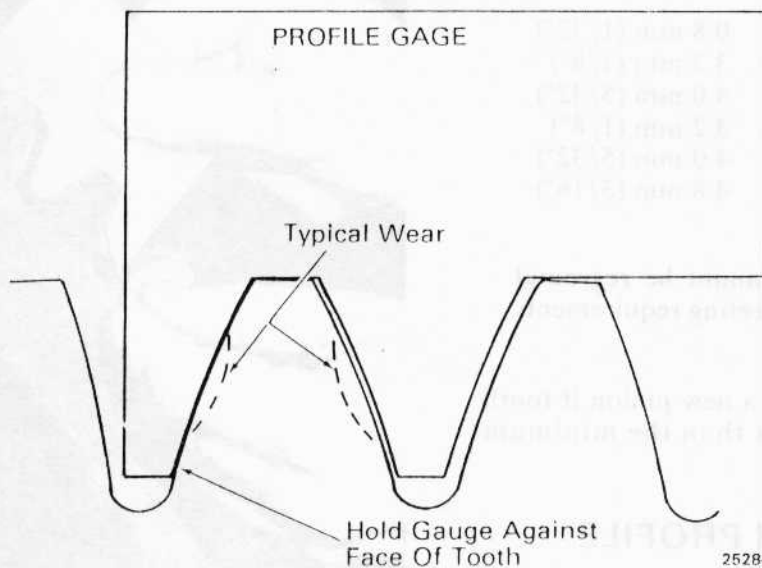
Measuring Profile Deviation And Wear Of Axle Gear
